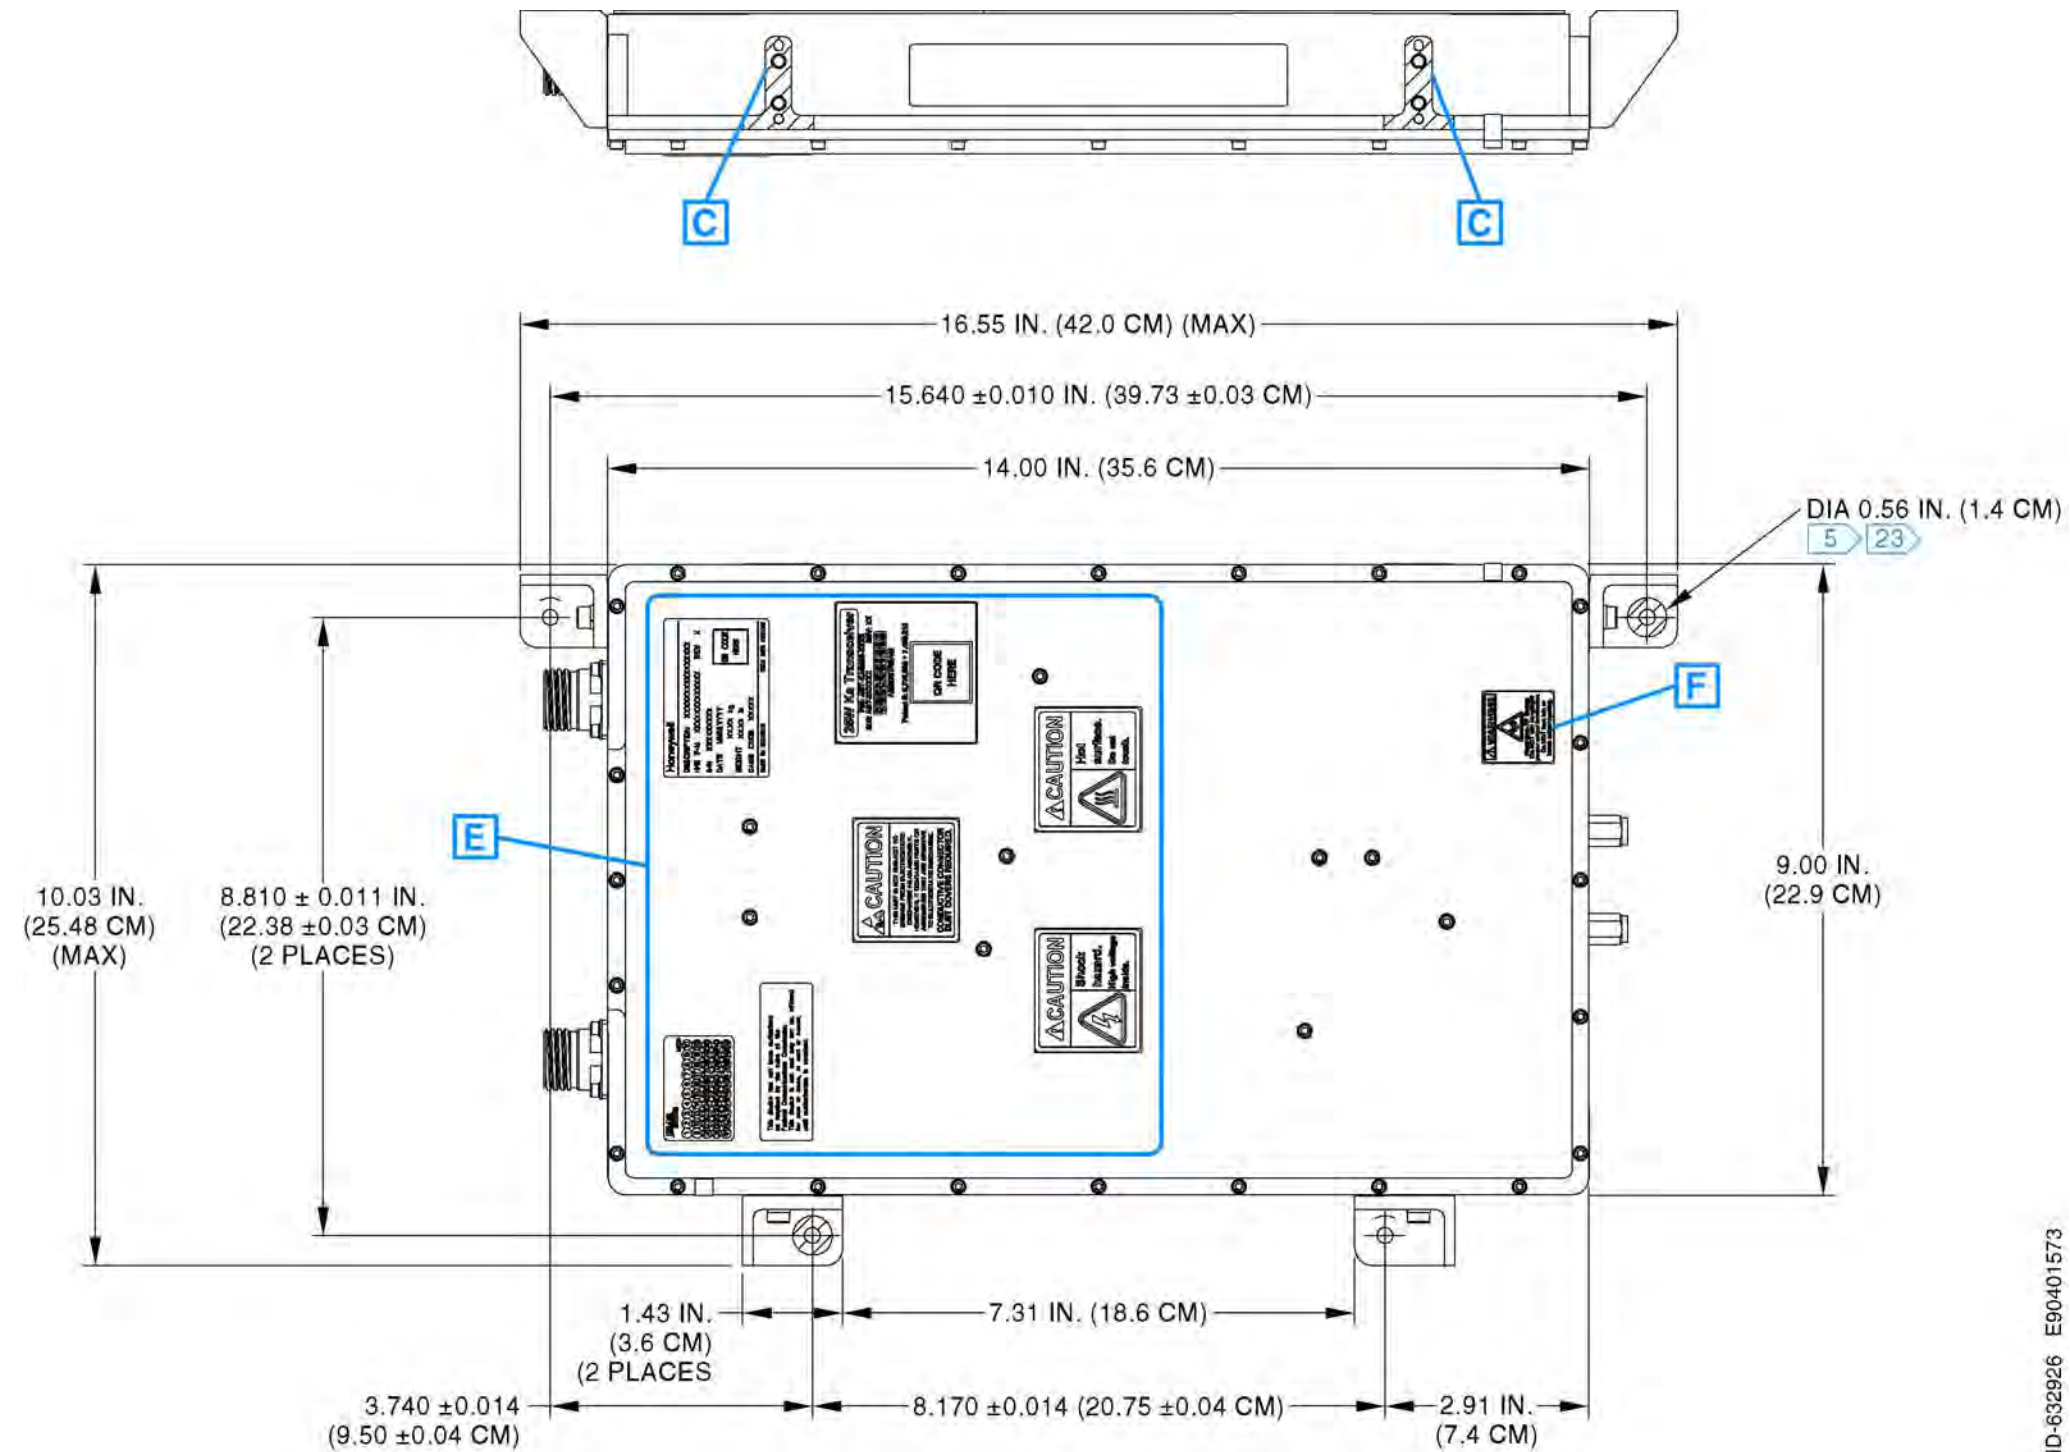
(Sheet 5 of 9) KRFU, Conduction-Cooled 1, Outline and Installation Drawing (90401573, REV F)
